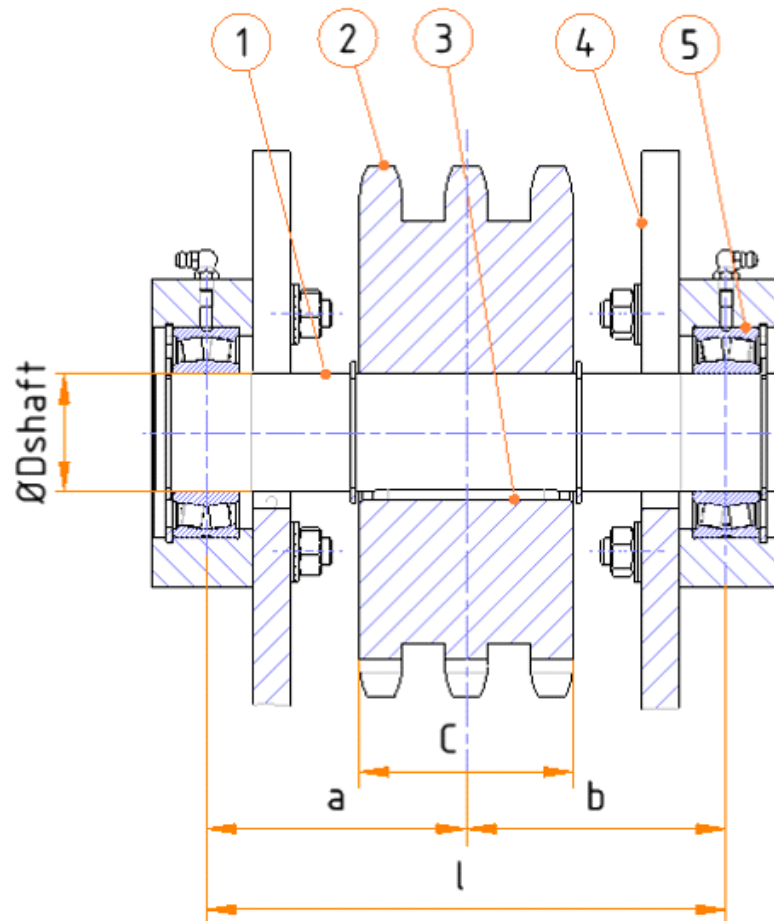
Components of the upper sprocket assembly: 1—upper sprocket shaft; 2—upper chain sprocket; 3—key; 4—upper sprocket assembly support; 5—roller bearings. See Table 1 for nomenclature.
